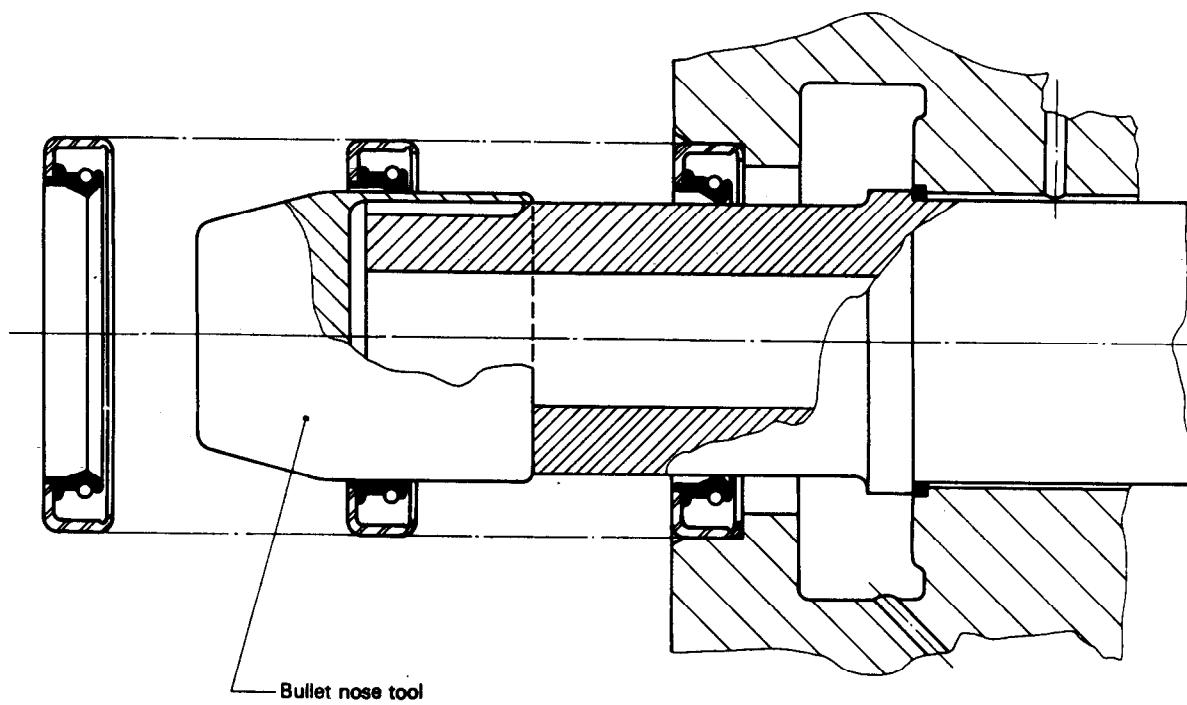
Special installation tool for use with seal elements which slide over splines, keyways or holes
